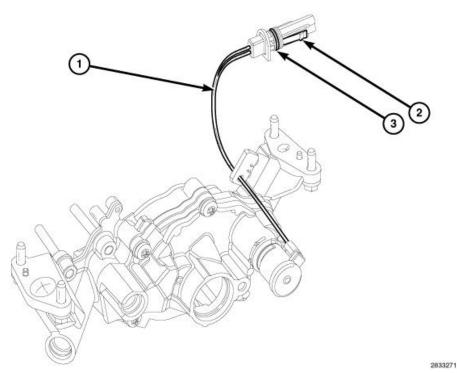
Solenoid Wires, Connector Retention Lock Tab & O-Ring Seal Courtesy of CHRYSLER GROUP, LLC
